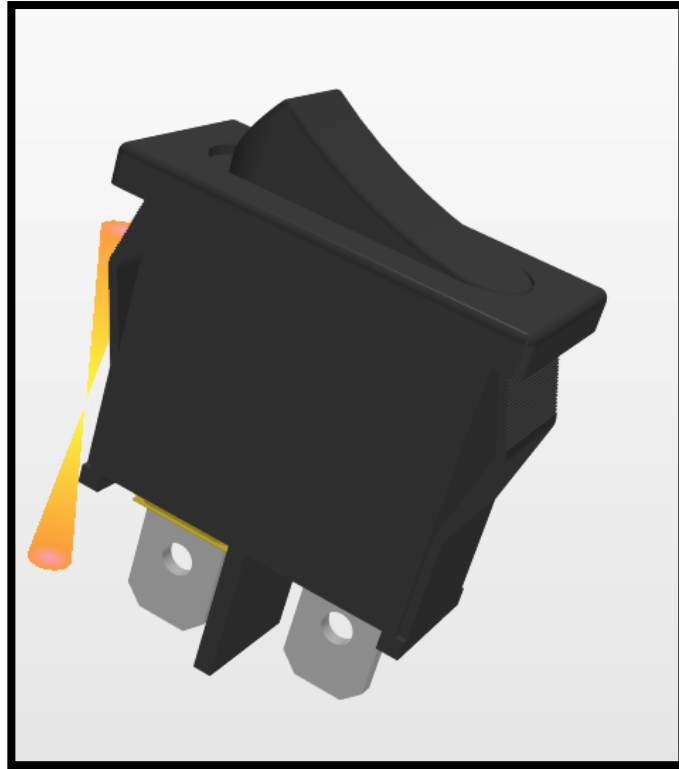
The 3D View of the Power Switch; RD11131100
